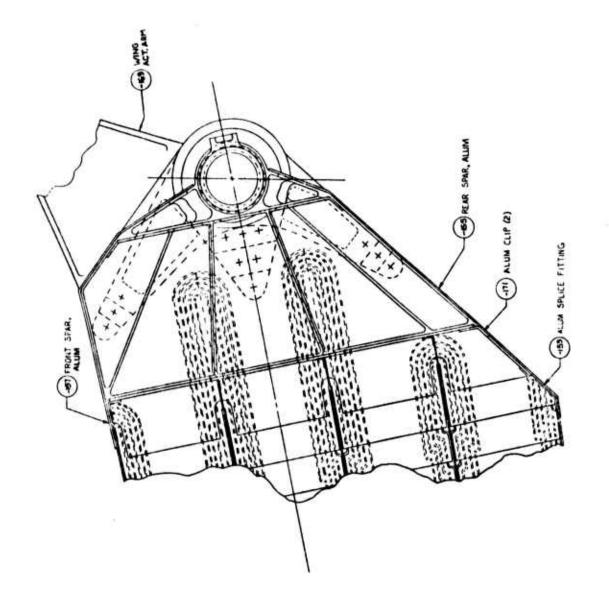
633RW002-1 Pivot Fitting (Sheet 1 of 2)
